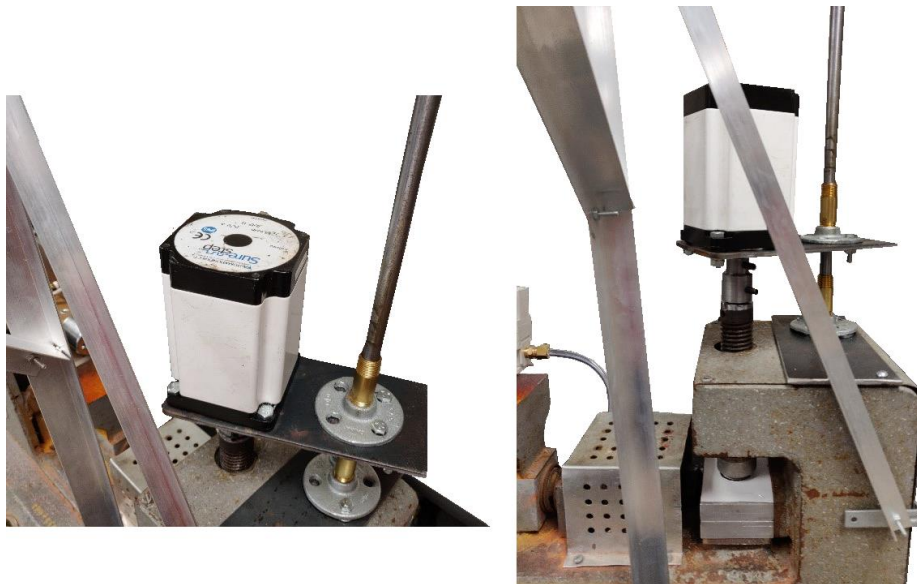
Stepper motor, threaded rod and fixture for mold clamp
